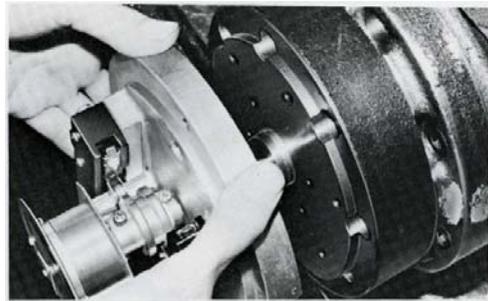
Removing High-stage Indicator Micro-switch Base Plate
